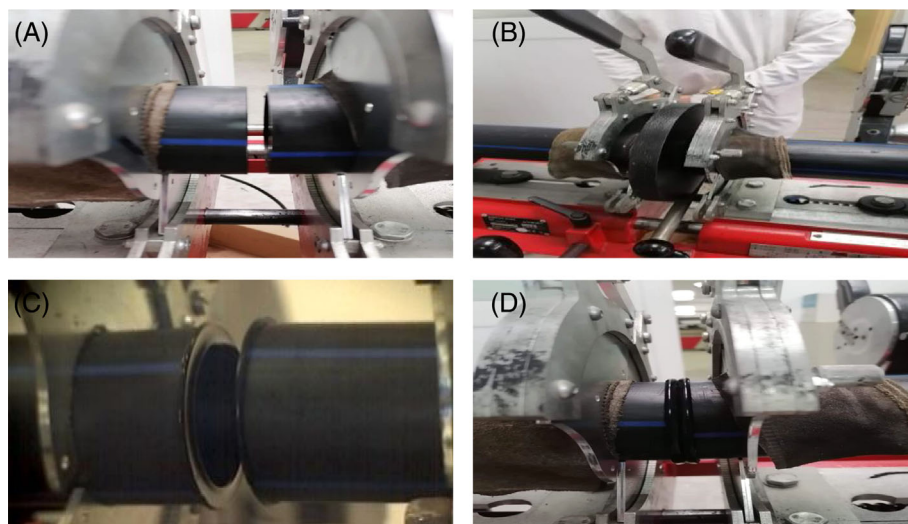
Different experimental phases of the welding process: (A) installation of the two ends of the pipes, (B) installation of a heating plate (equalization heating), (C) heating plate removal phase, and (D) welding and cooling phase.
